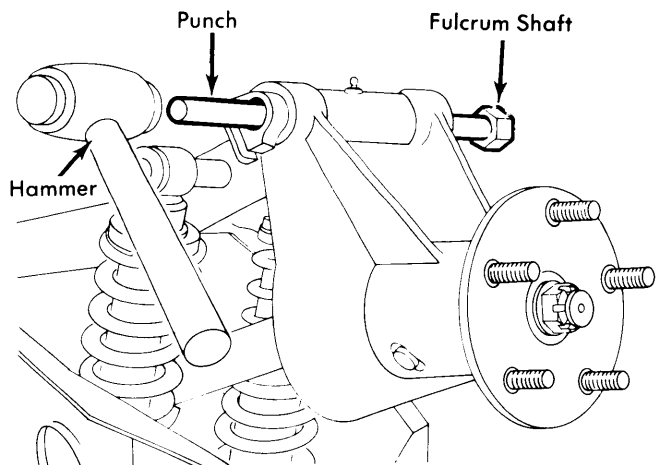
View Showing Removal of Control Arm Outer Fulcrum Shaft
